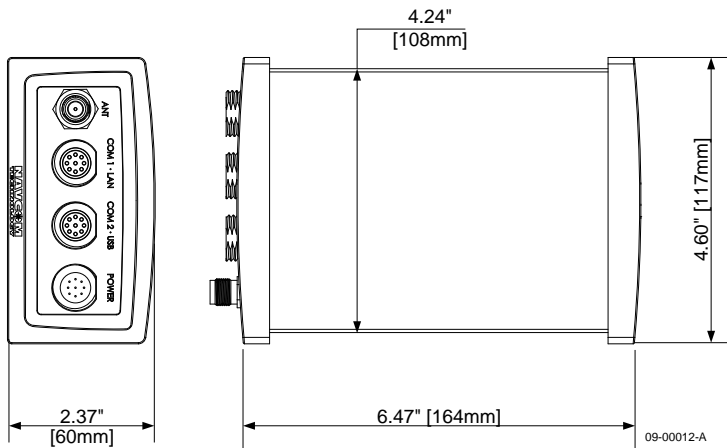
SF-3050 Base Plate Dimensions Without Mounting Brackets
